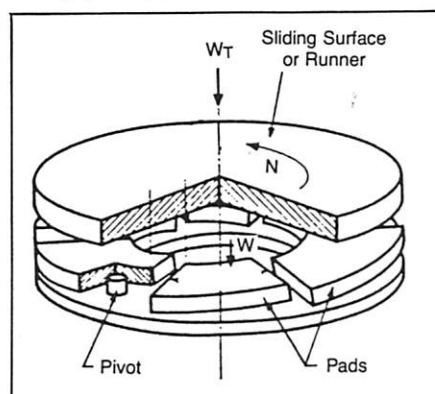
Tilting-pad thrust bearings incorporate segmented pads mounted on pivots. A typical bearing might include 14 pads on a 128-inch outside diameter circle. In this figure,  $W_T$  = total thrust load;  $N$  = rotational speed; and  $W$  = pad load.
